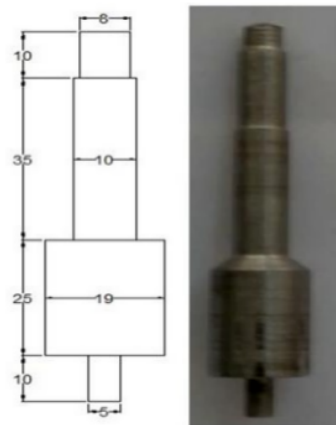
Tool dimension (in mm) and photo of tool shoulder
